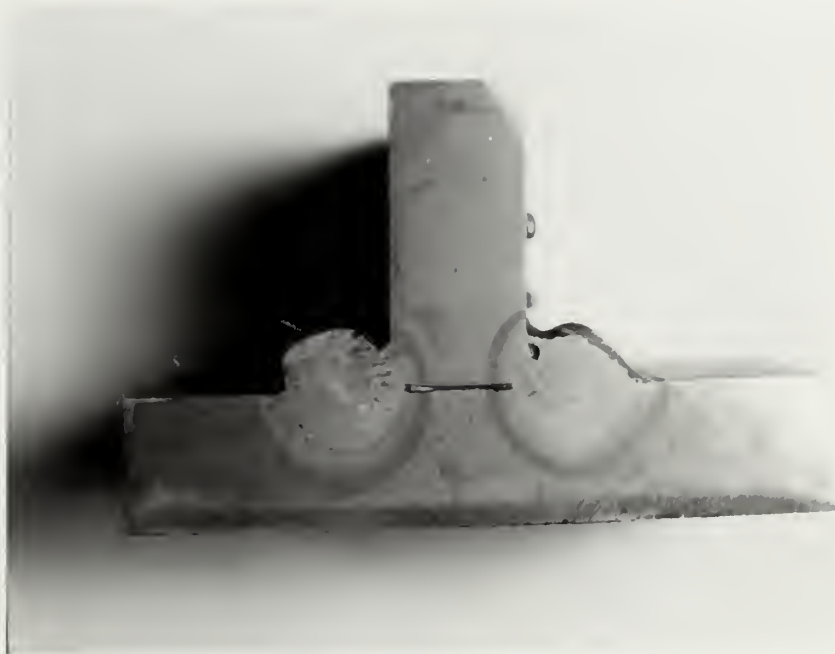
Single pass underwater welded tee joint using E11018 electrode. (3x, 3% Nital etch)
